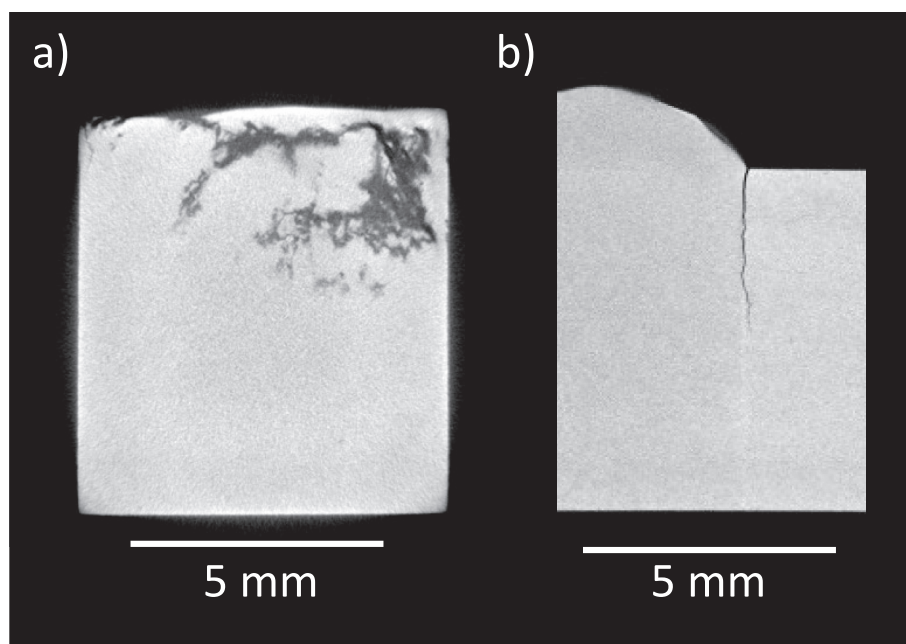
| X-ray CT scan outputs from sample X2 showing (a) horizontal cross section at the weld toe showing the crack geometry and (b) central vertical cross section showing crack geometry at the weld toe.
